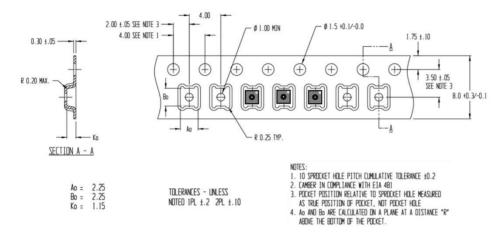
Technical drawing of the packaging tape with sensor orientation in tape. Header tape is to the right and trailer tape to the left on this drawing. Dimensions are given in millimeters.
